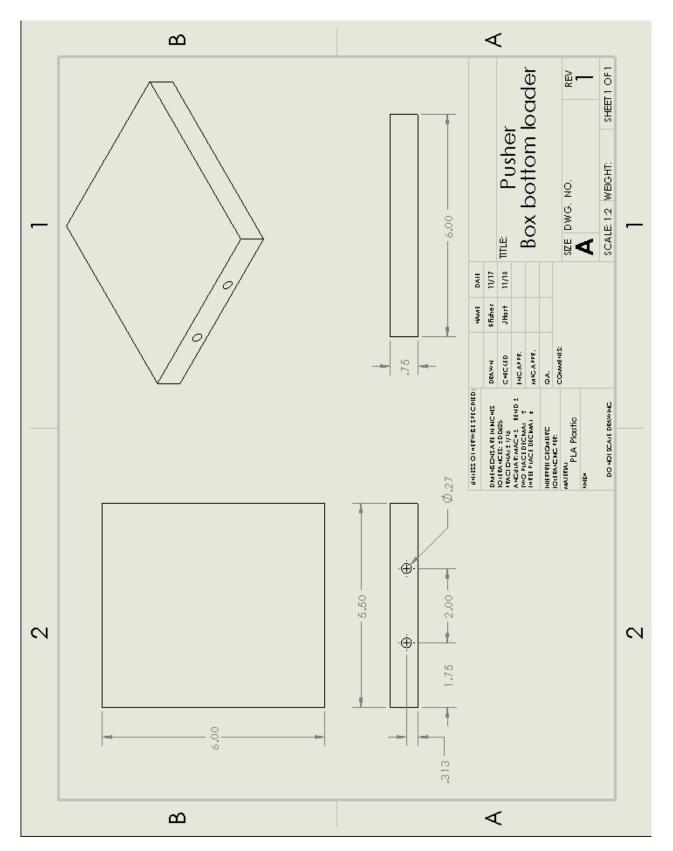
Box Bottom Dispenser Pusher Drawing (not to scale)
